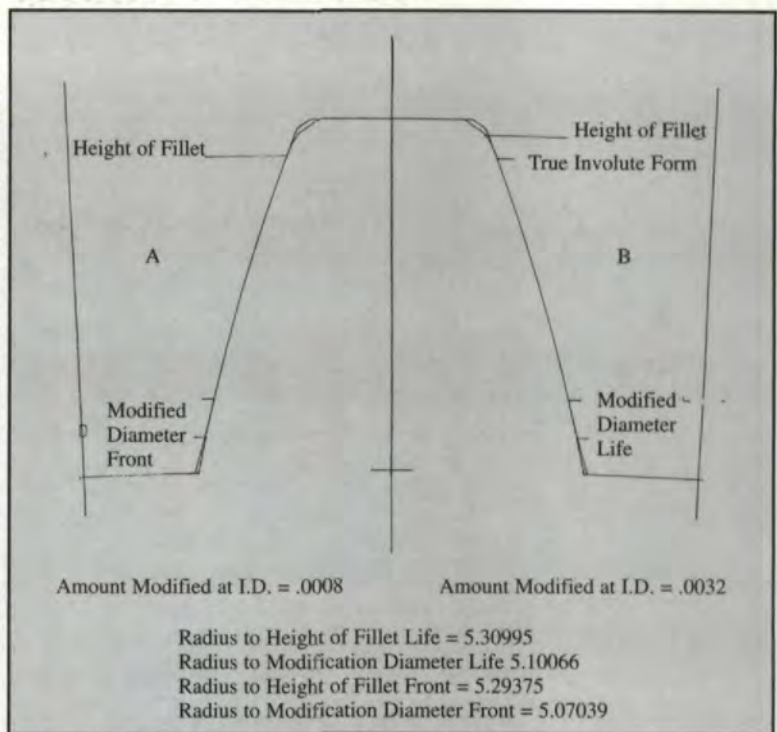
Tip Modification: 6/8 DP 20° PA internal gear.
